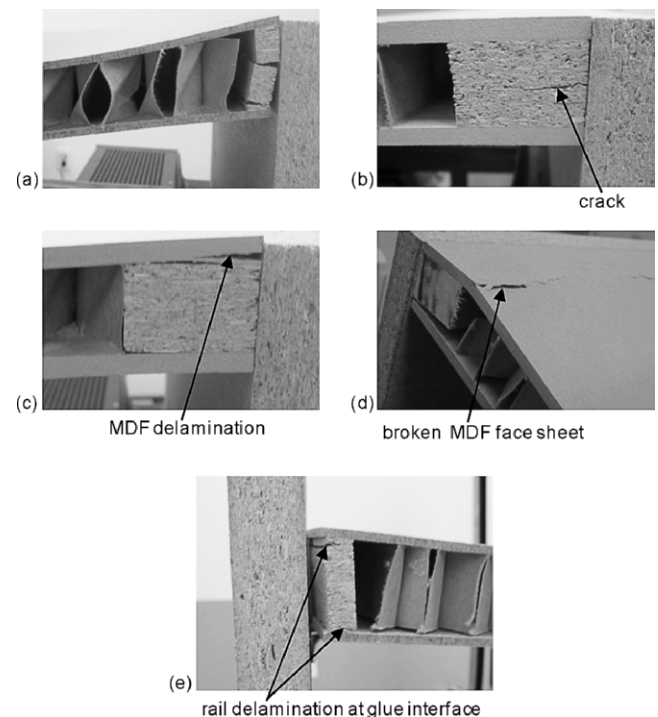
Honeycomb shelf failure modes: (a) broken 10-mm particleboard rail, (b) cracked 38-mm particleboard rail, (c) delaminated MDF face sheet, (d) broken MDF face sheet, and (e) rail delamination at glue lines.
